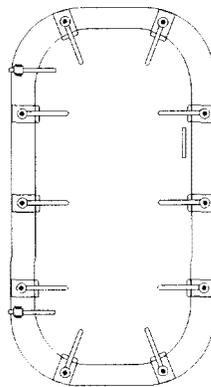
Glass-Reinforced Plastic Individually Dogged Watertight Door
